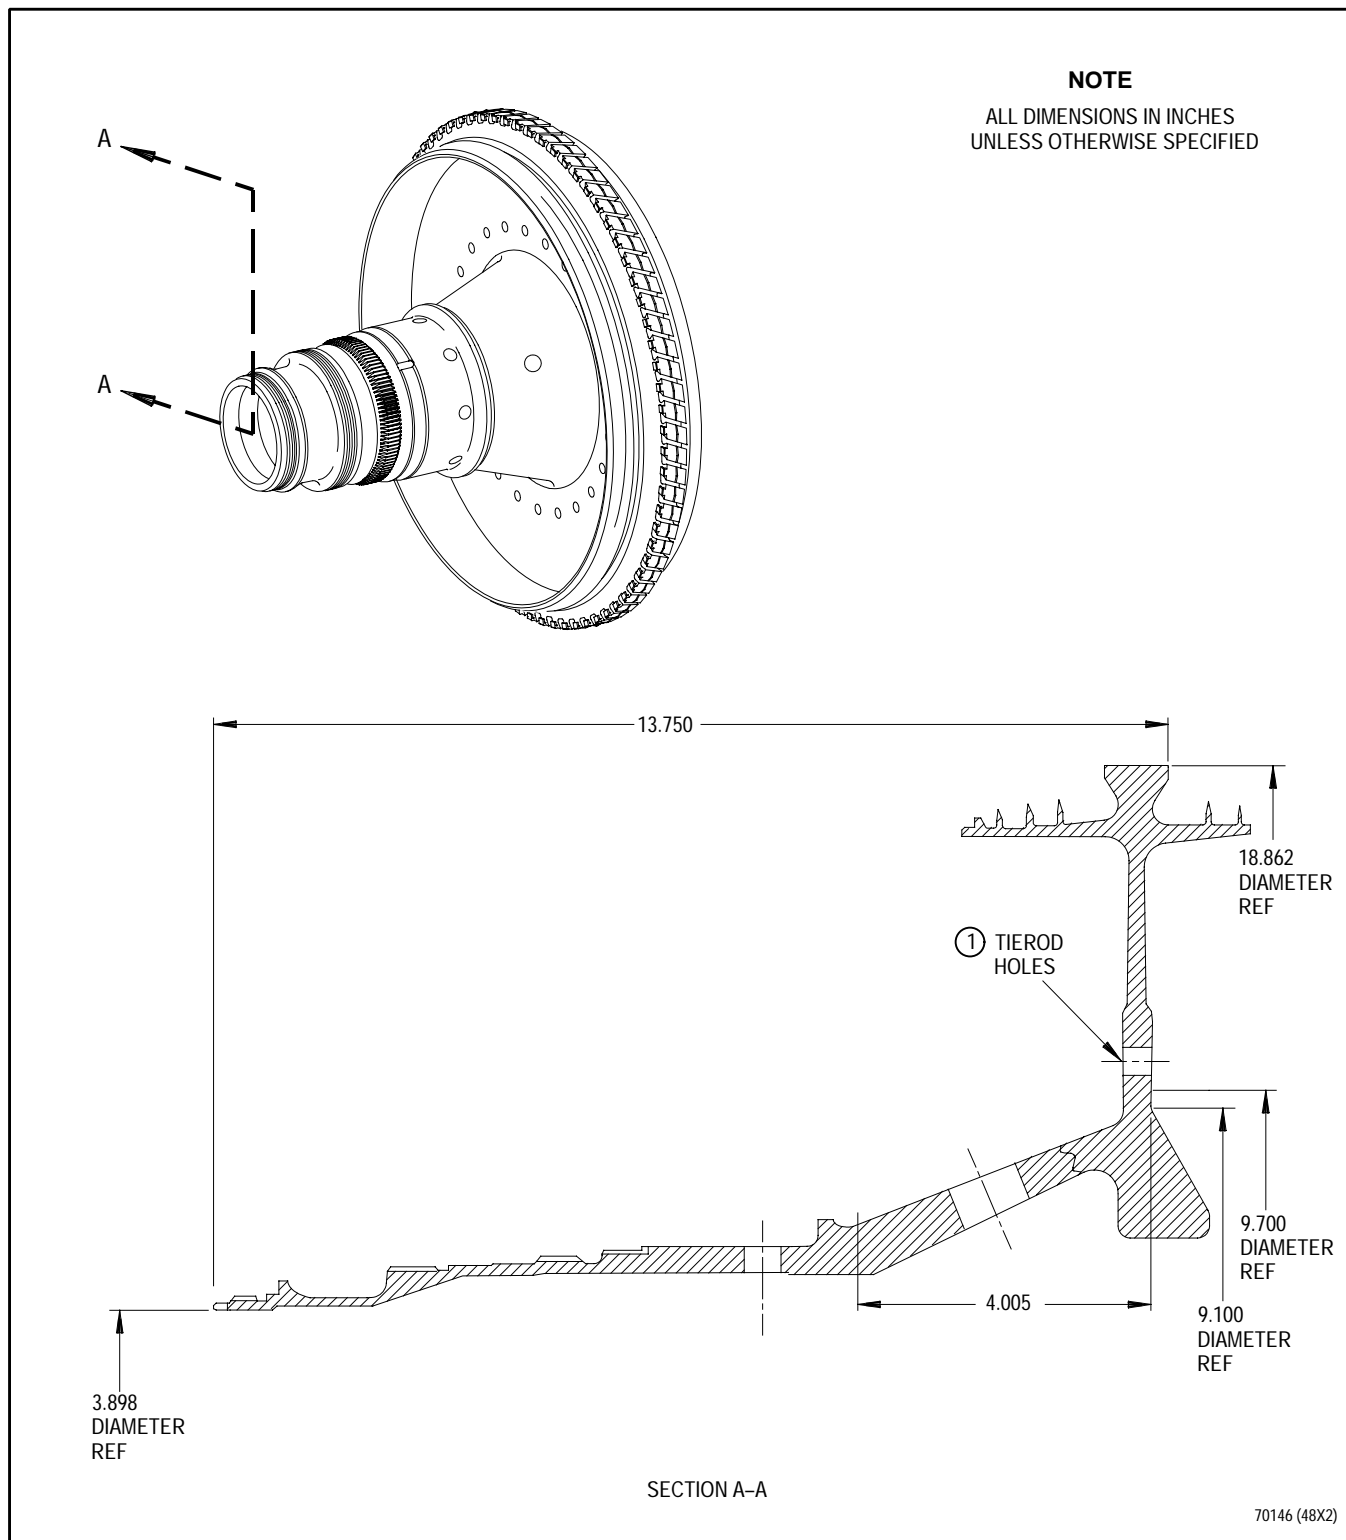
B. Sixth Stage Compressor Disk and Hub Assembly - Eddy Current Inspection
